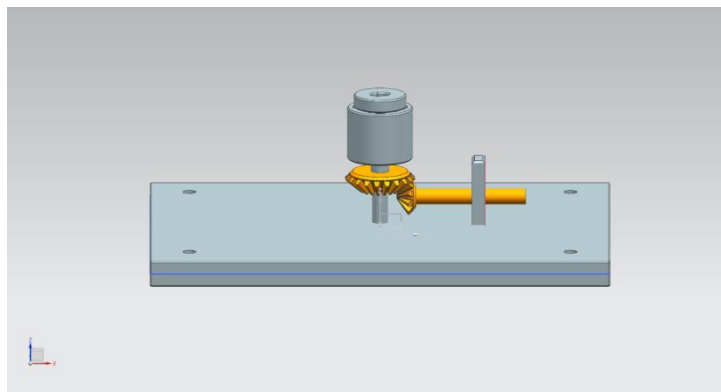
Bevel gear, Wall, Plunger and Base plate assembly
